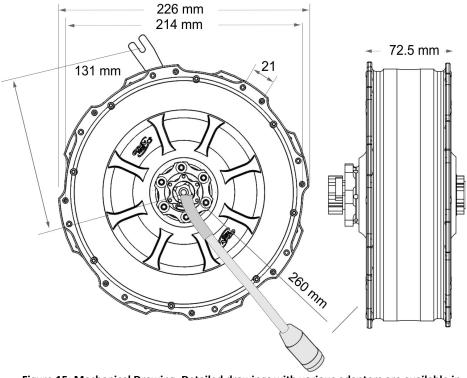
Mechanical Drawing. Detailed drawings with various adapters are available in separate document.
